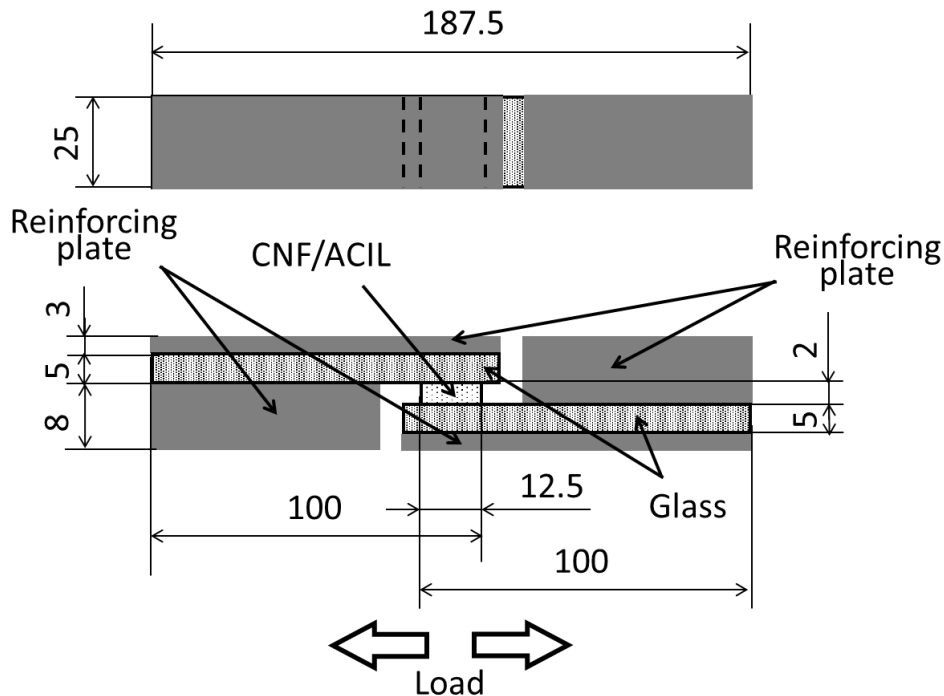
Shape and dimensions of specimens with G-CNF/ACIL adhesive interface for tensile shear tests.
